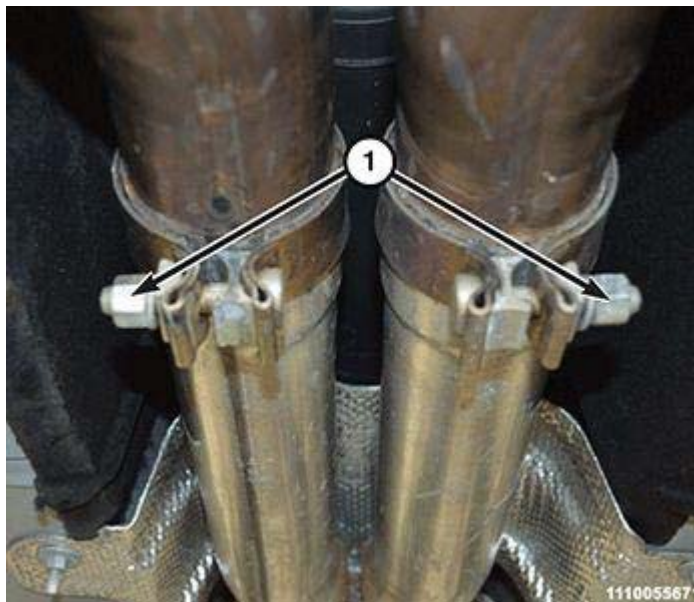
Front Exhaust Pipe To Muffler And Resonator Assembly Band Clamps
